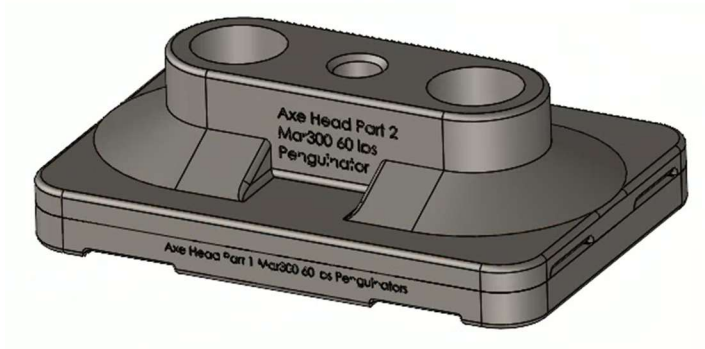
The axe head mold was designed as a two-part mold which included 4 separate axe heads. Each mold required 60 pounds of Mar300 to fill. The mold features two large risers to promote feeding and a tapered gate attached to each axe head.
